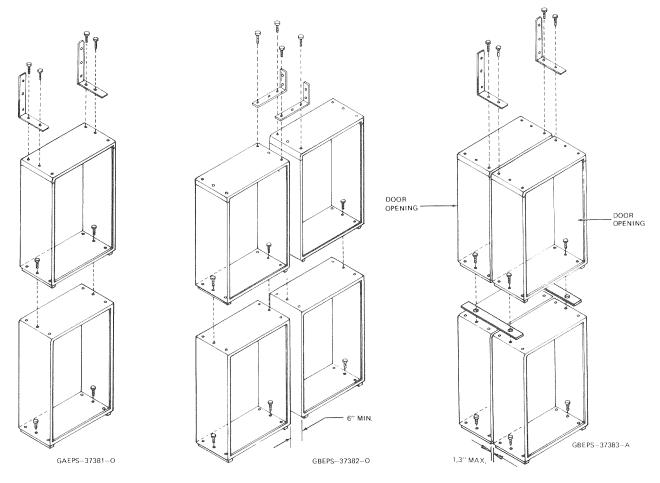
Bracket Installation for Overhead Support of Single Cabinet Stacks
